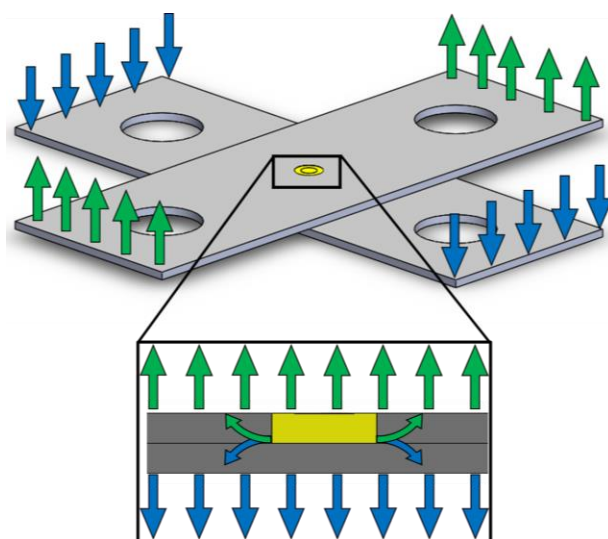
Schematic representation of the loading directions during cross-tension testing and the stresses produced on the weld.
